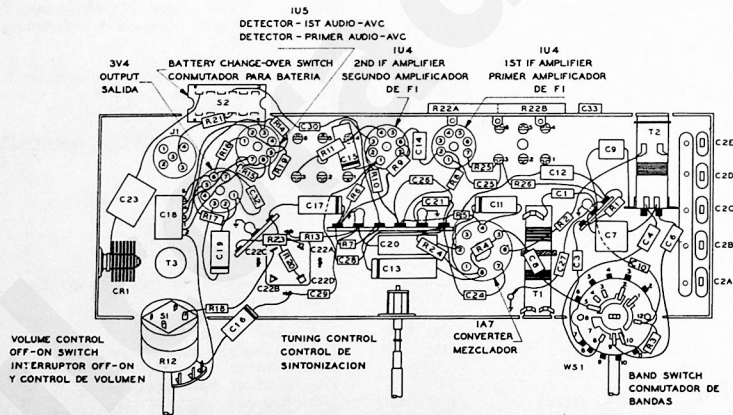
SYMBOLIZED CHASSIS, SHOWING PARTS PLACEMENT
